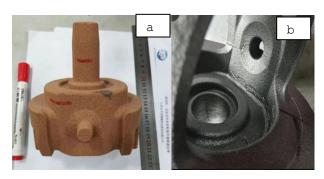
Defected casting and core(a)Core with 0.7% additive;(b) defected casting.
